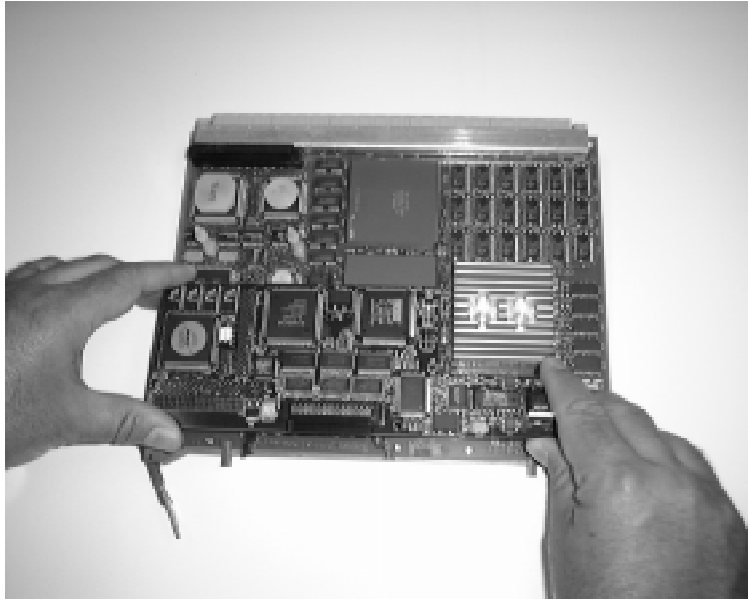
Installing the DS-KZCCA-CB VAX™-SCSI Adapter
